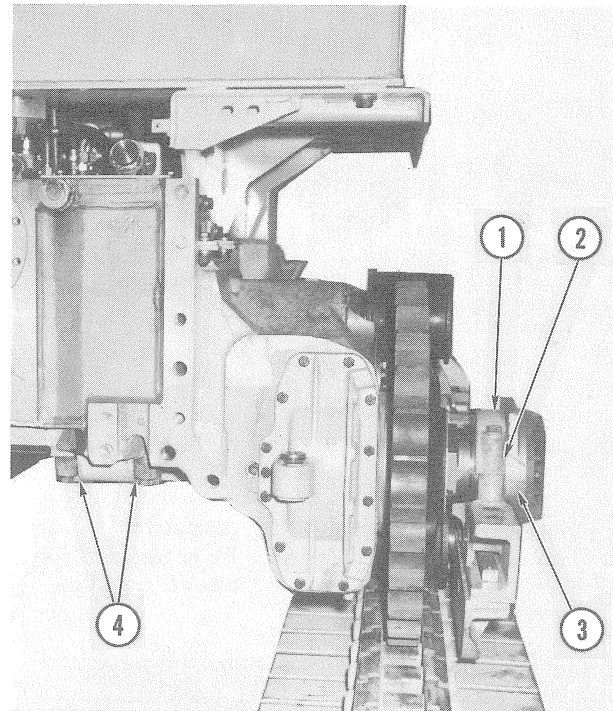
INSTALLING PIVOT SHAFT OIL SEAL
